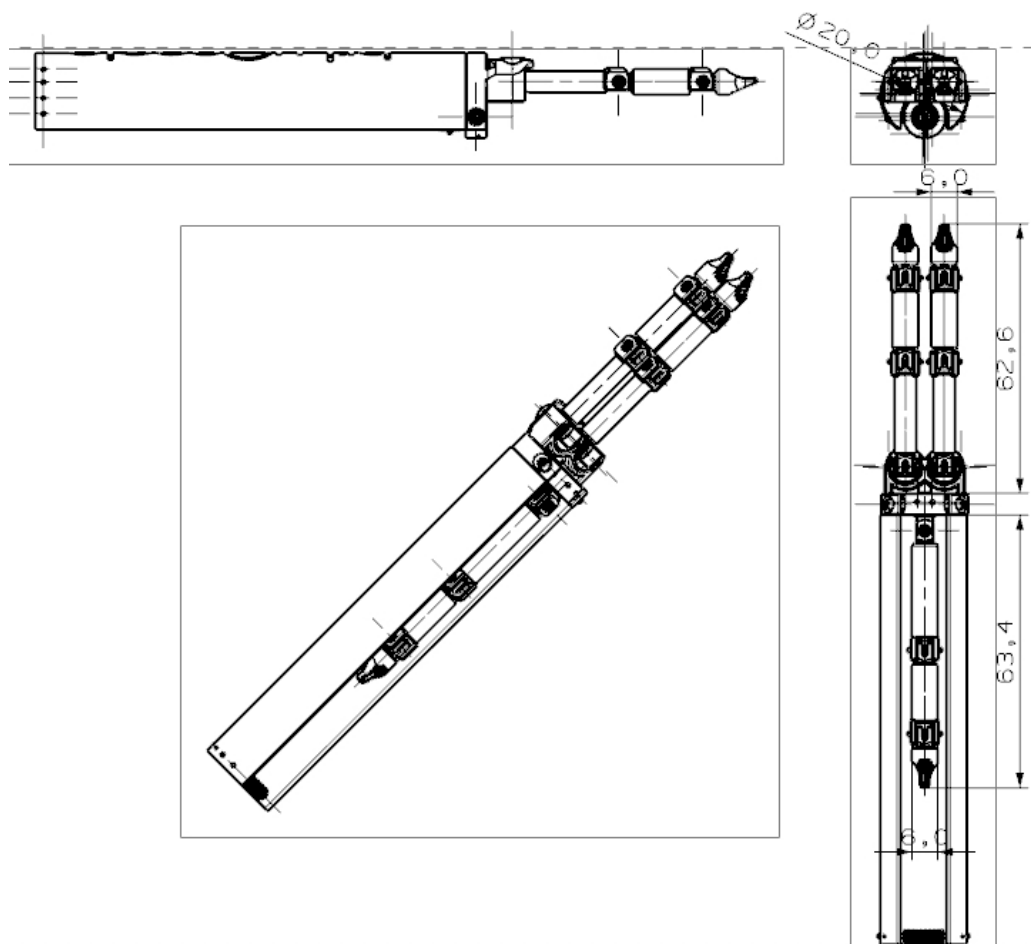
CAD drawings of cable-driven instrument prototype (assembly)
